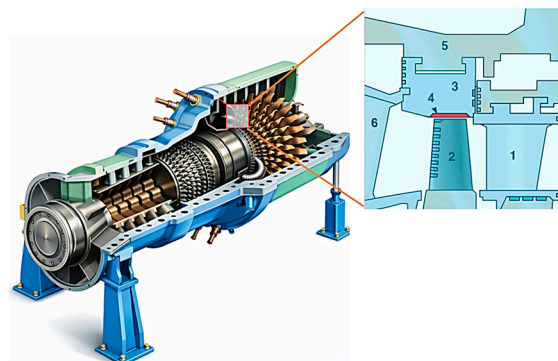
Location of the sealing coating in the gas turbine engine compartment: 1—first-stage guide apparatus; 2—first-stage turbine blade; 3—sealing band segment; 4—high-temperature ceramic sealing coating; 5—housing; 6—second-stage guide vane.
